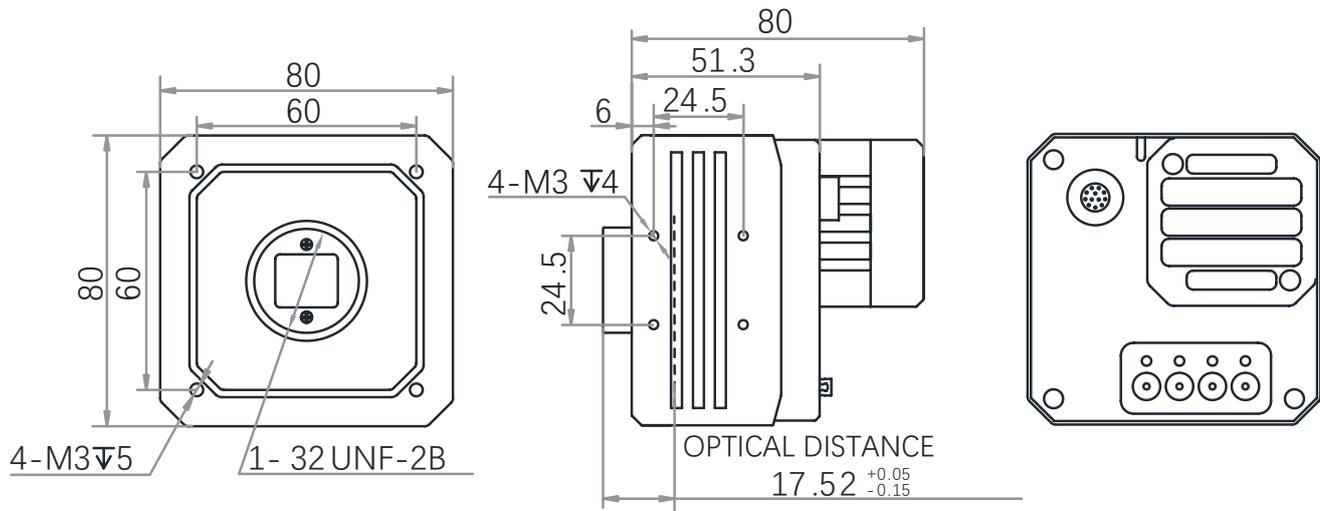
80 * 80 * 80 mm mechanical dimensions of the CoaXPress camera with C-Mount, which adopts M3 specification screws.
